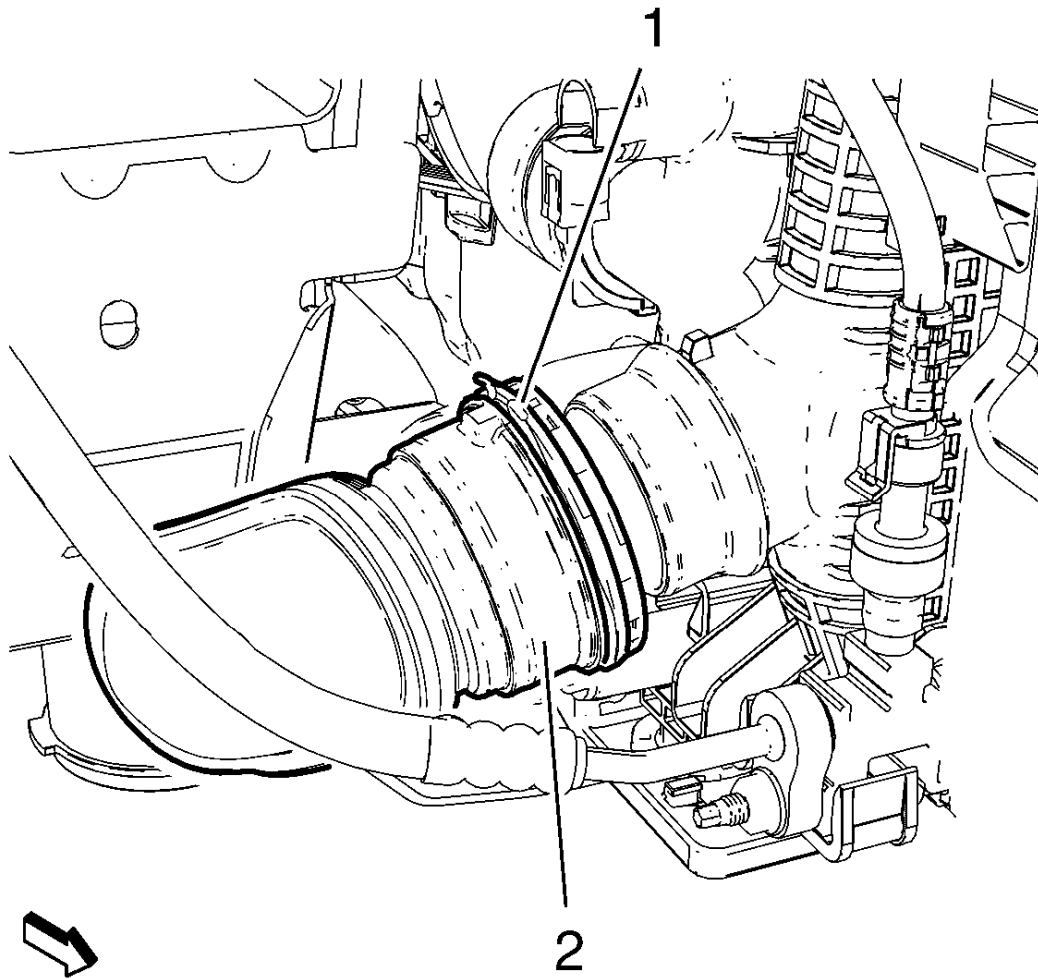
Charge Air Cooler Inlet Air Hose Quick Connector
